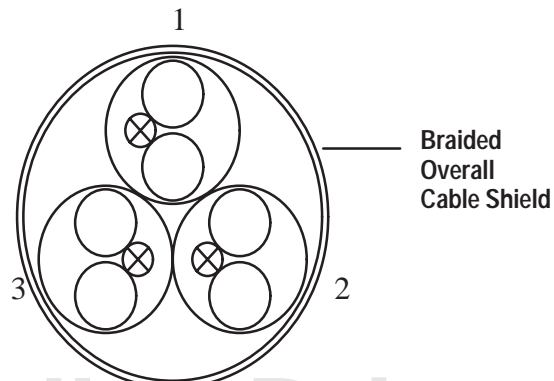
1326-CCU-xxx Resolver Cable End View "A"
